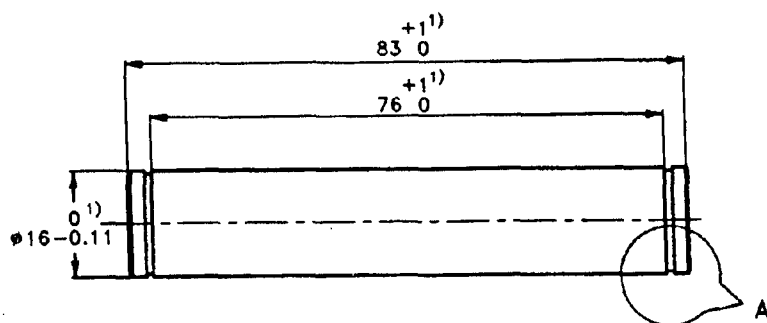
HEAD ASSEMBLY PARTS (Continued)
